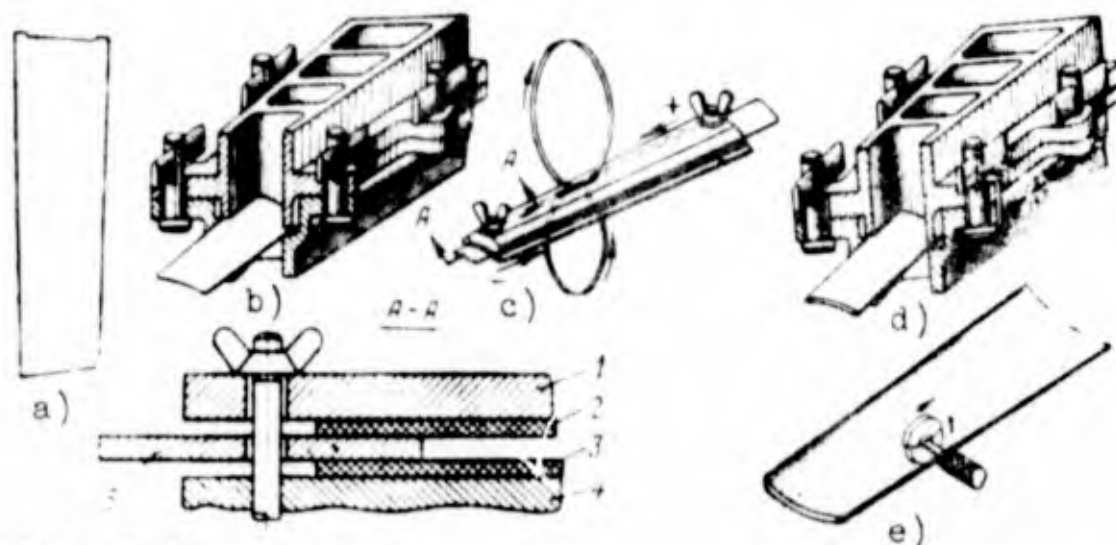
Flow chart of manufacture of hollow rootless stator blade of compressor from sheet of OT4. a) initial blank; b) molding and thermal fixing; c) roll welding of edges; d) thermal fixing after welding; e) finishing of edges. 1) cover plate; 2) back of blade; 3) bucket of blade; 4) base; 5) insert.
